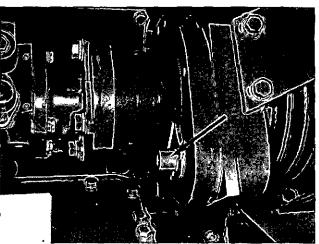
(V51486) Engine barring arrangement (V-903)
